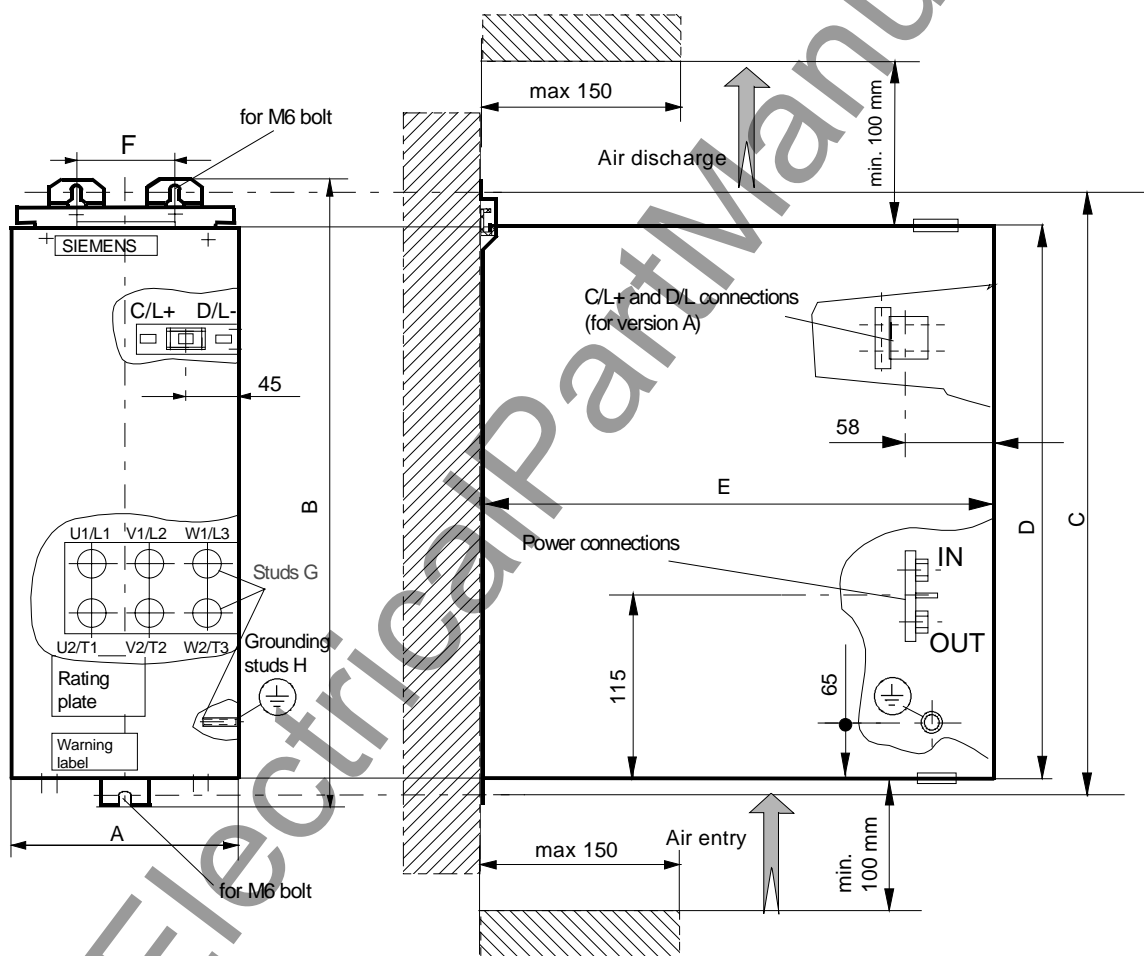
Dimension drawing of sinusoidal filters, size A to D
